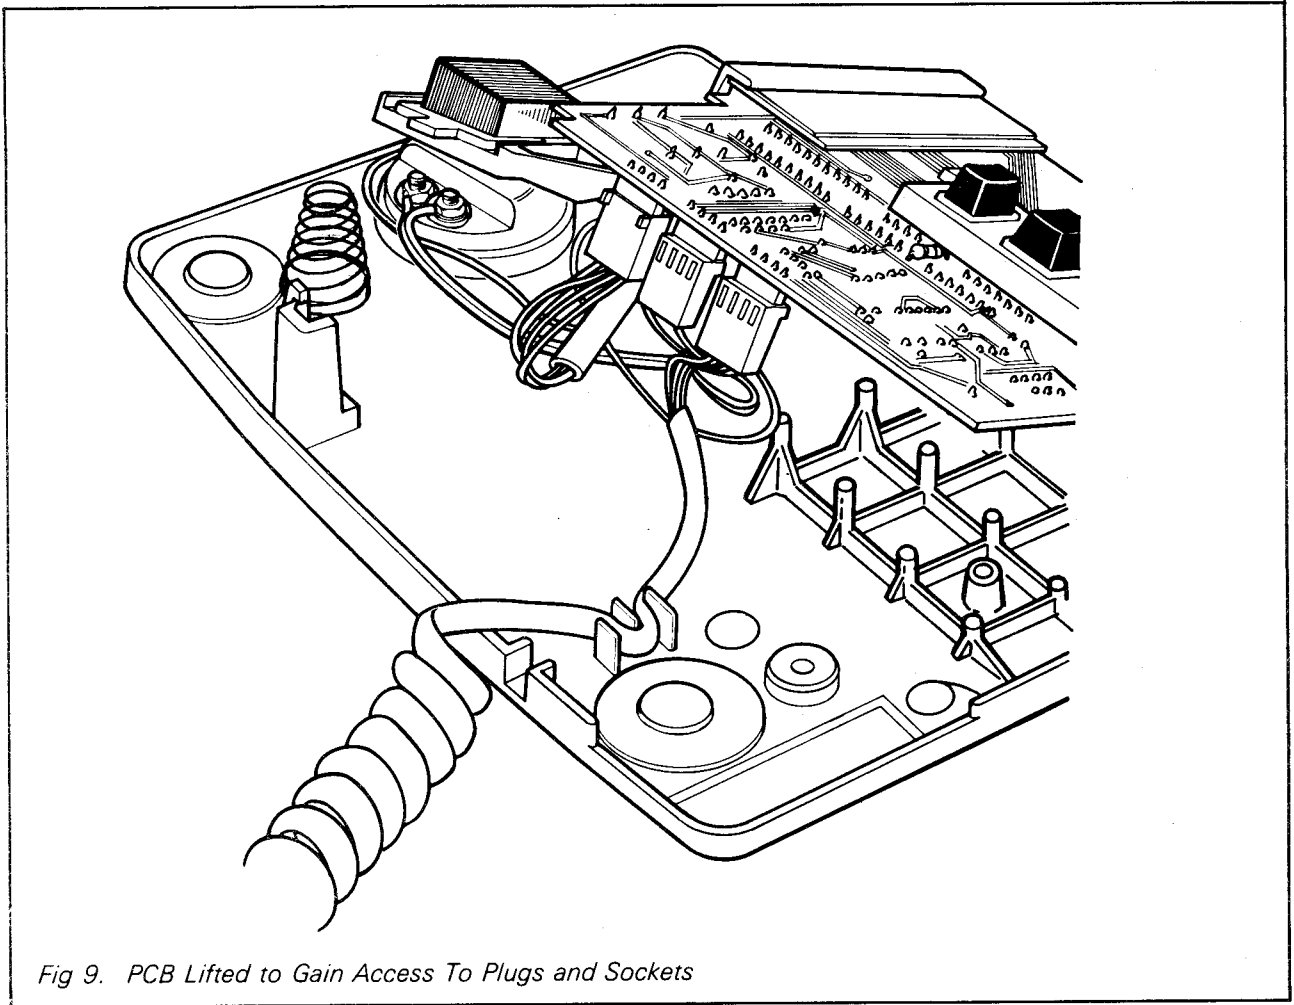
PCB Lifted to Gain Access To Plugs and Sockets
